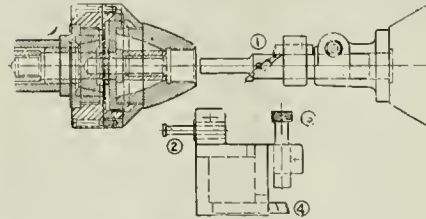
TOOL LAYOUT FOR THIRD OPERATION.
